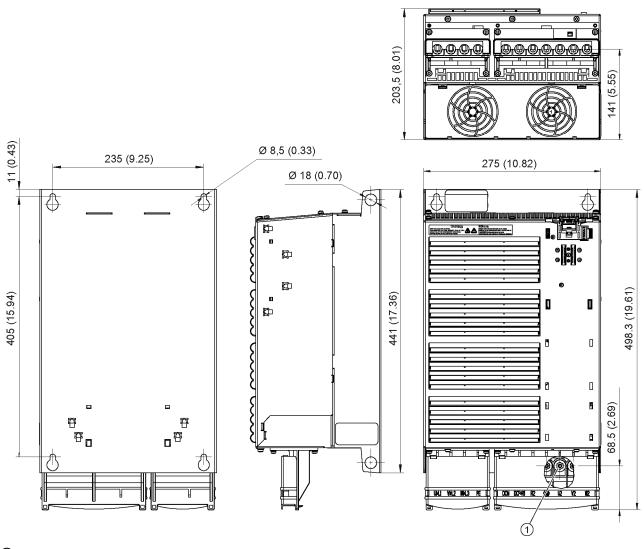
Dimension drawing, PM340 Power Module, frame size FSD (with integrated line filter); all dimensions in mm and (inches)
